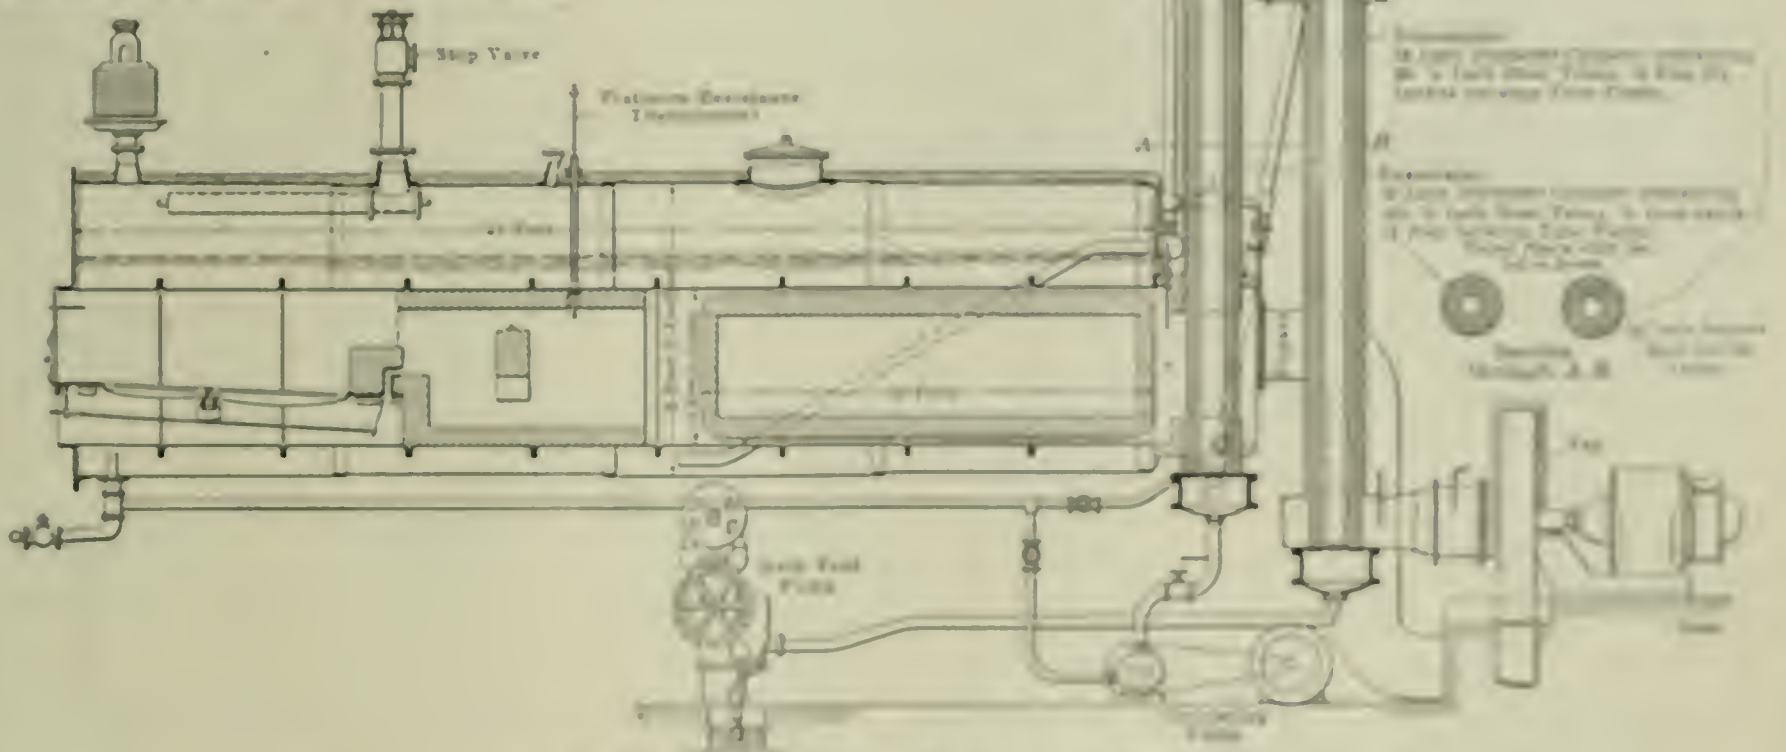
SECTION THROUGH EXPERIMENTAL BOILER
